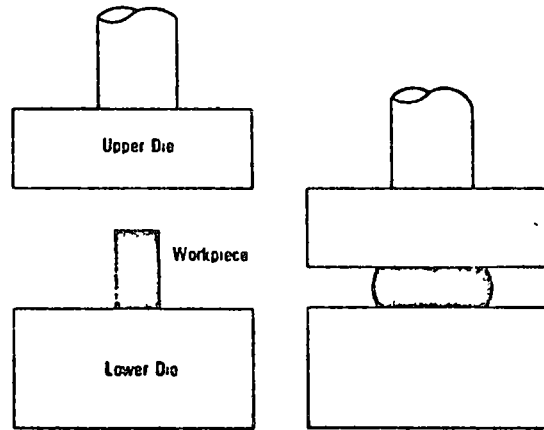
A pancake forging produced by upsetting a round rod between flat dies.
